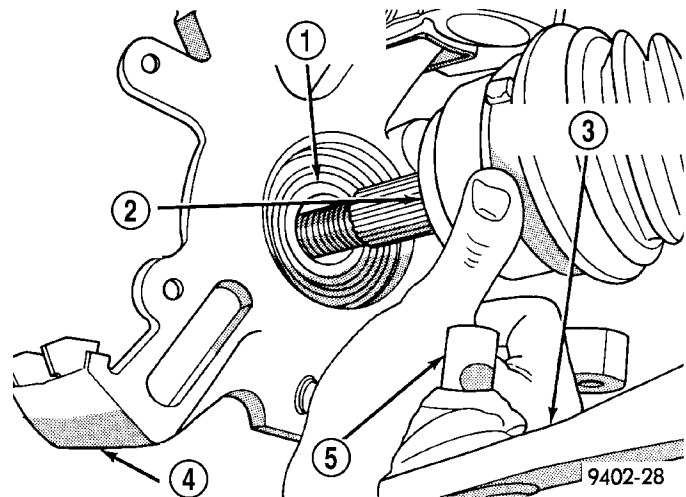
Steering Knuckle Installation on Outer C/V Joint
